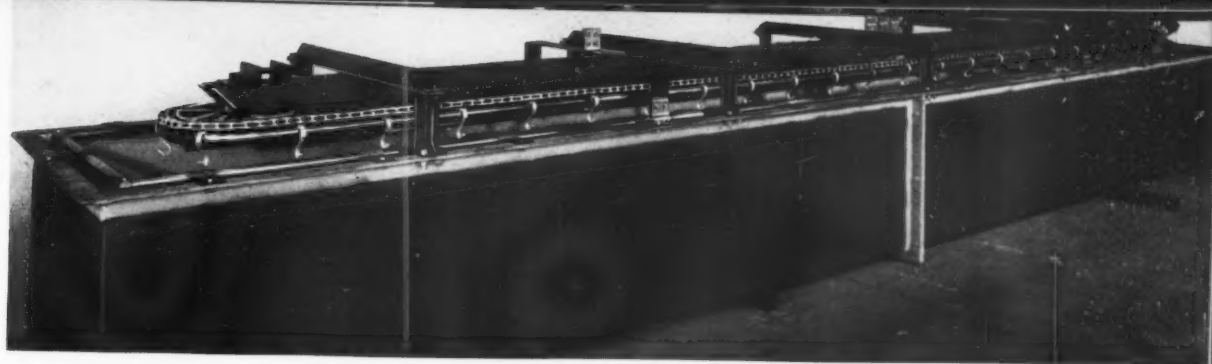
Operating in a horizontal plane, chain on this semiautomatic plating machine has a hollow pin for insertion of carrying hooks. Fig. 4—Below—At each end is an idler around which chain turns
